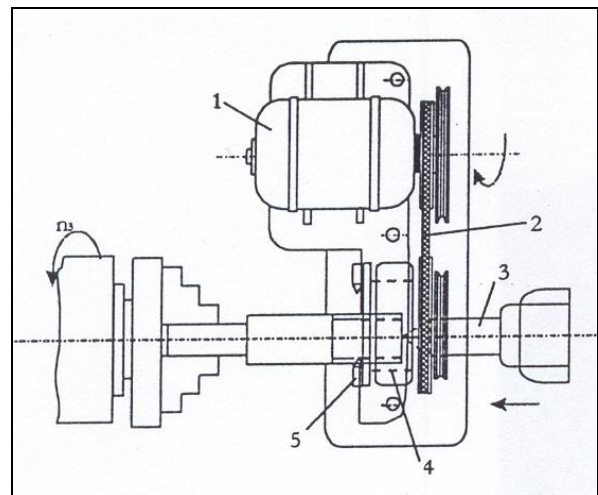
Scheme of mowing (1 - electric engine, 2 - belt, 3 - dead centres, 4 - bearing, 5 - cutting head) [1]
